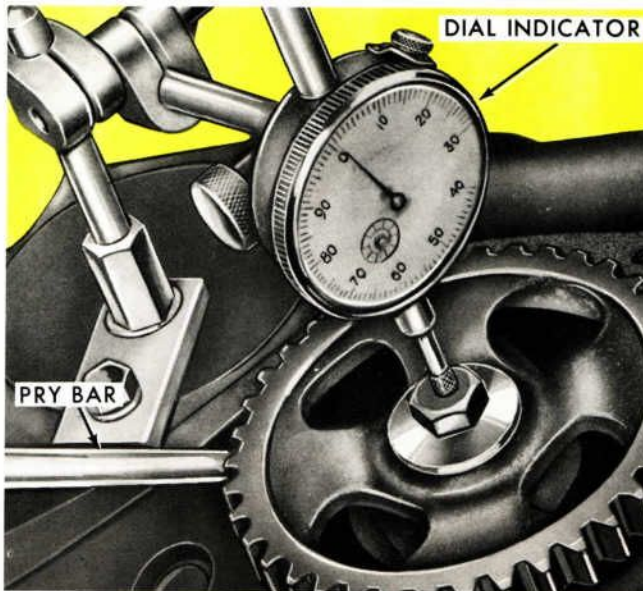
CHECKING CAMSHAFT END PLAY
